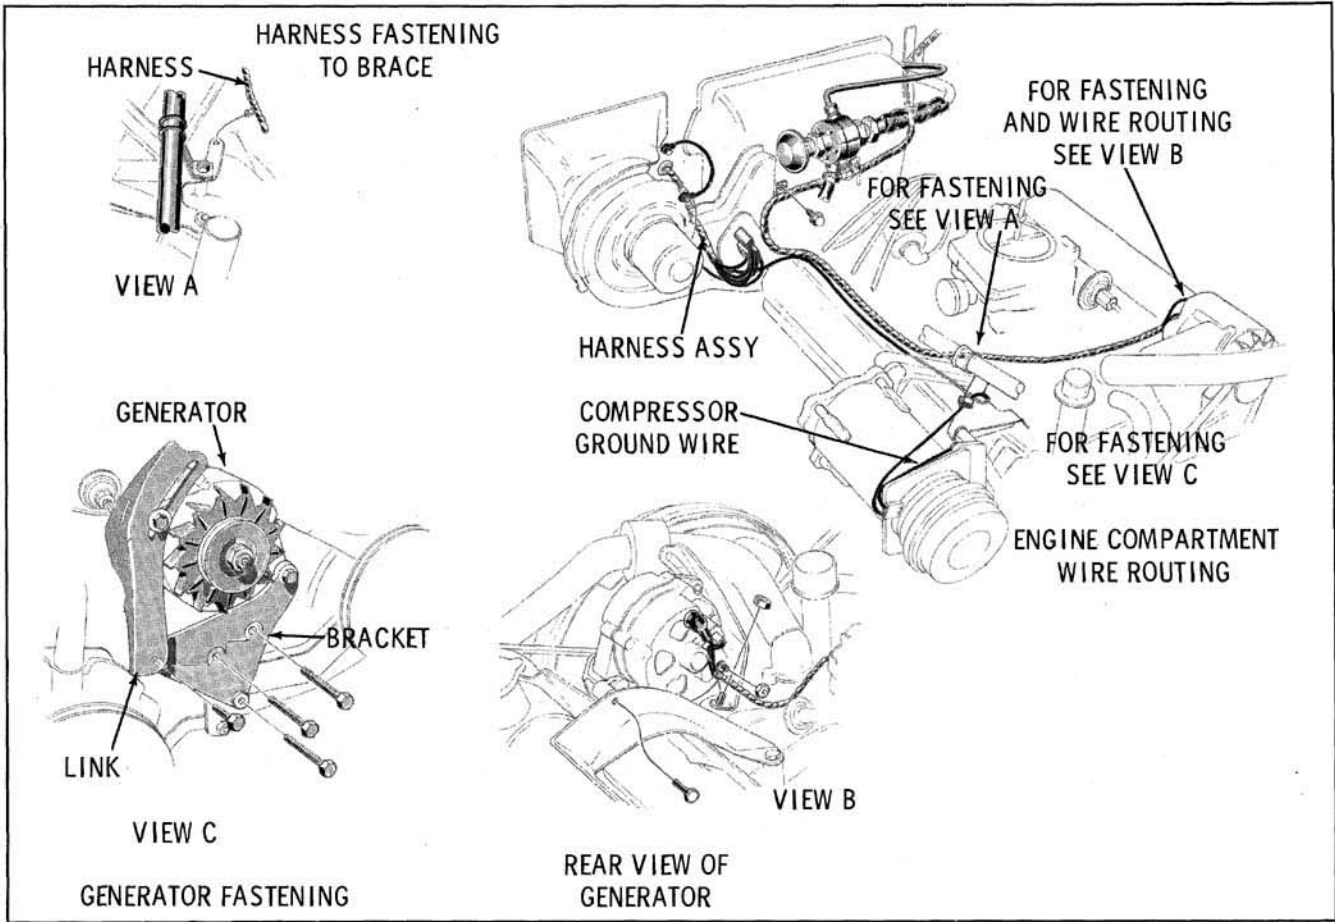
Wiring - Engine Compartment (52 through 86 Series)
